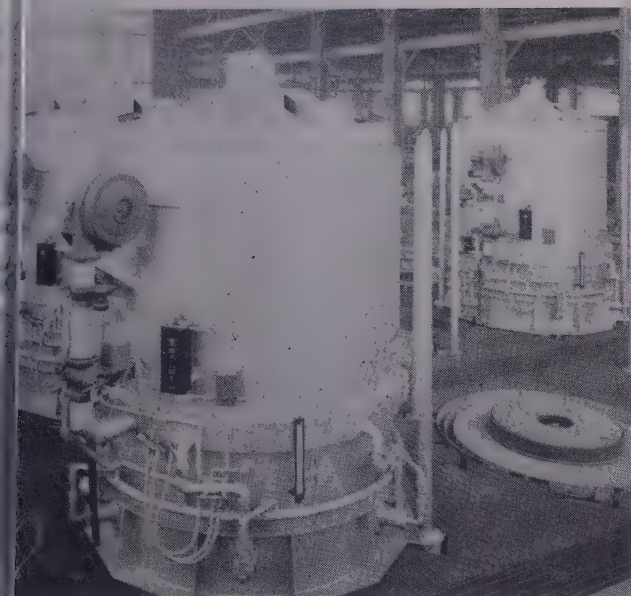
Cylindrical type portable gas fired furnaces for narrow strip. Lee Wilson Engineering photo
